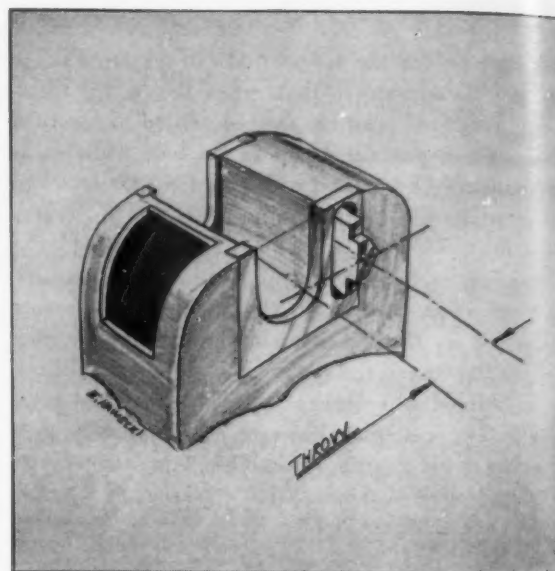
Detail of locating pin on left head that accurately locates and guides the crank cheek in proper relation to the crank throw during assembly.
